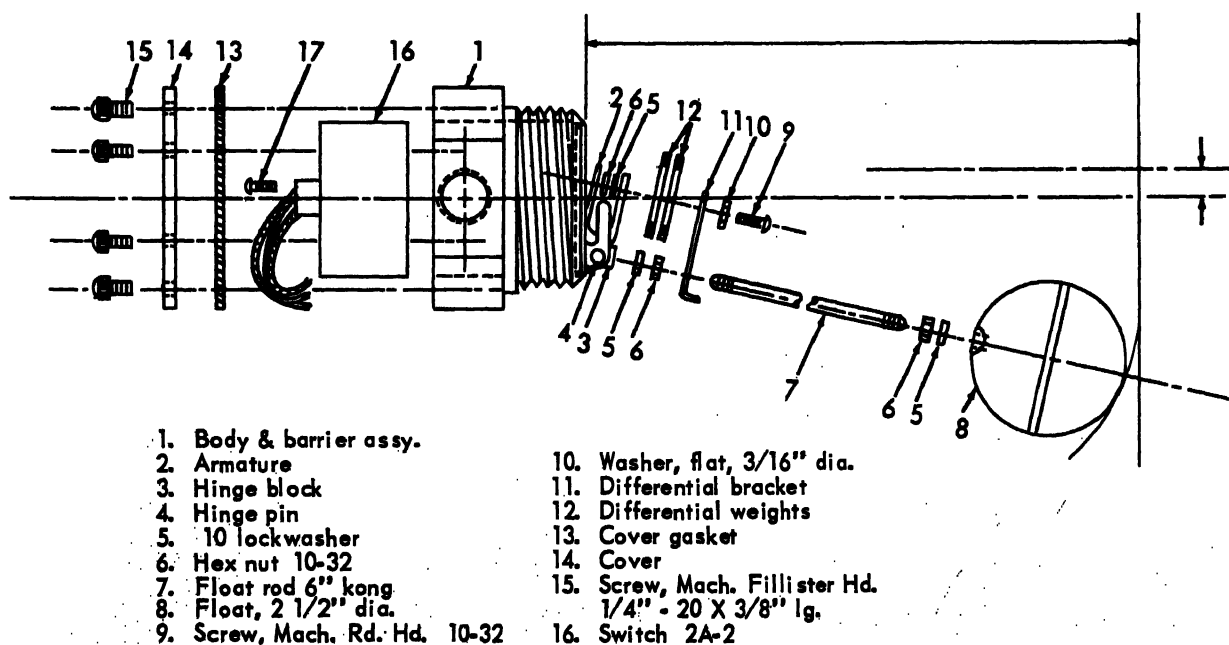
LOW LEVEL ASSEMBLY AND DISASSEMBLY
